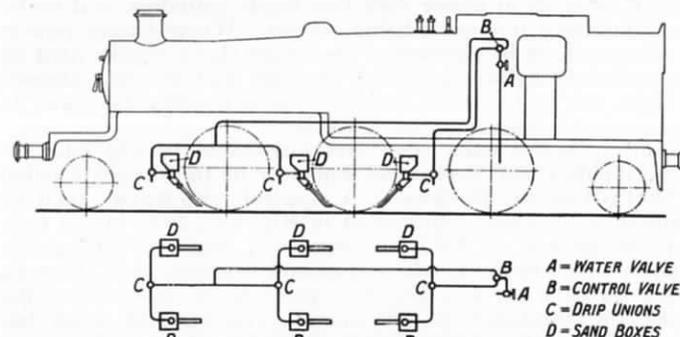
ARRANGEMENT OF LAMBERT WET SANDING GEAR ON LOCOMOTIVE.
